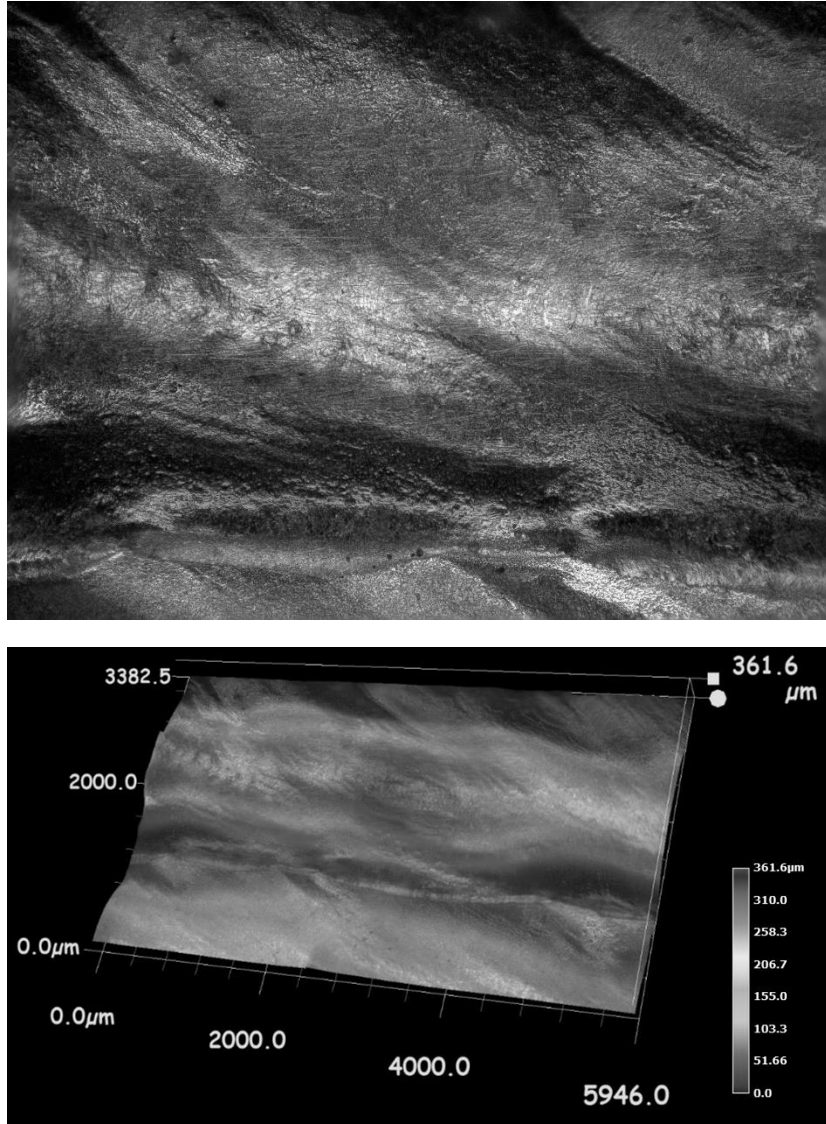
As welded macrostructure of the side of oval 1.
